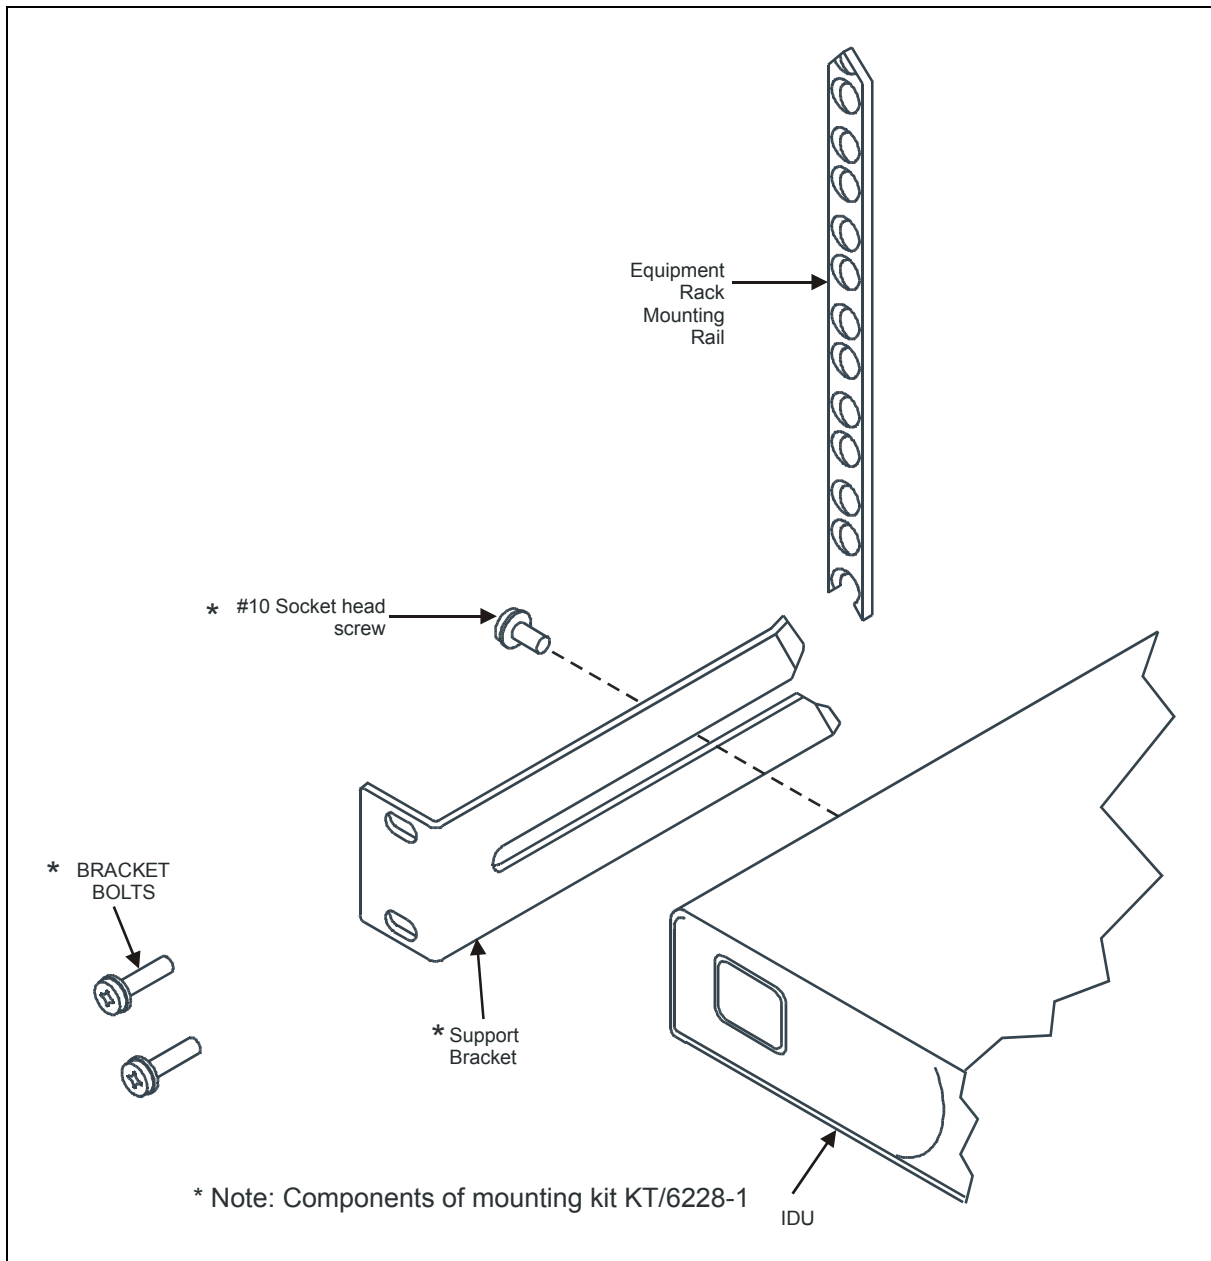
IDU Installation with Optional KT/6228-1 Rear Mounting Bracket.
